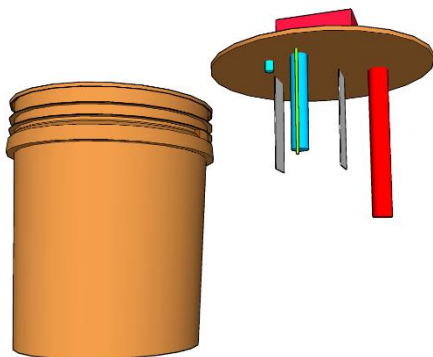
Design of Mechanical Device (Hardware) form Bottom View
